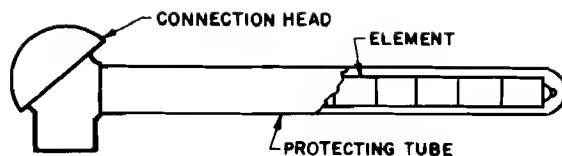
Thermocouple Element with Protecting Tube and Connection Head
